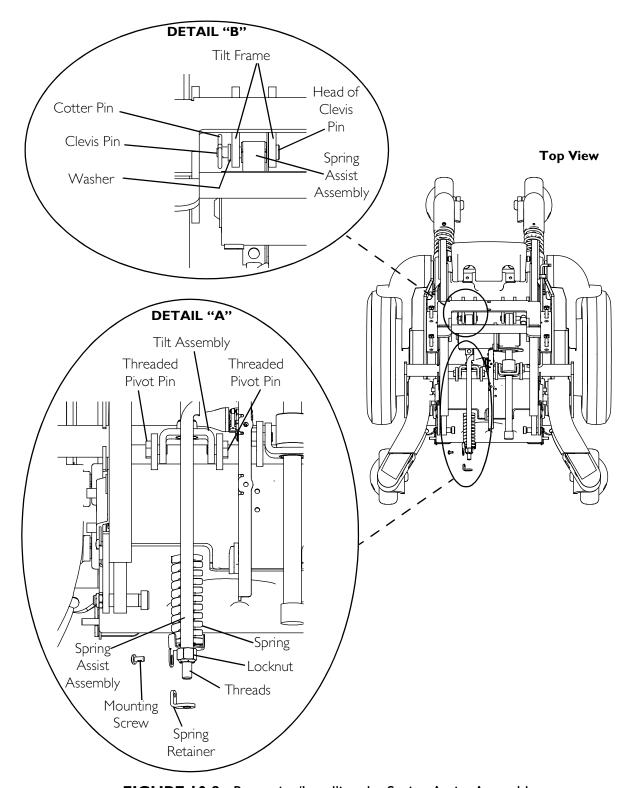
Removing/Installing the Spring Assist Assembly
